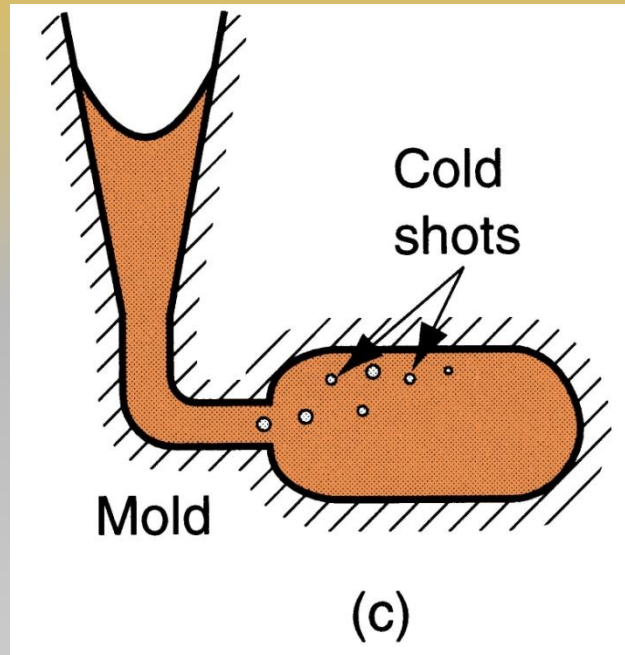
Some common defects in castings: (c) cold shot
